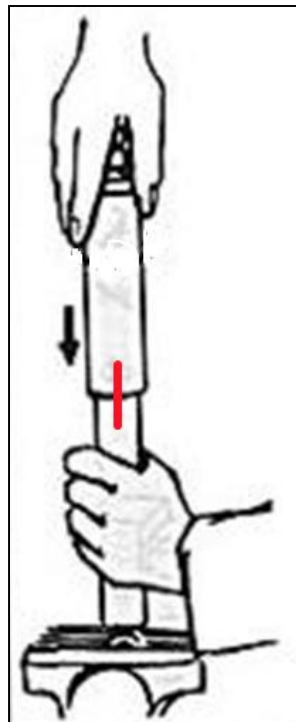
Drawing a Mark Line along the Dust Cap and Piston Rod
